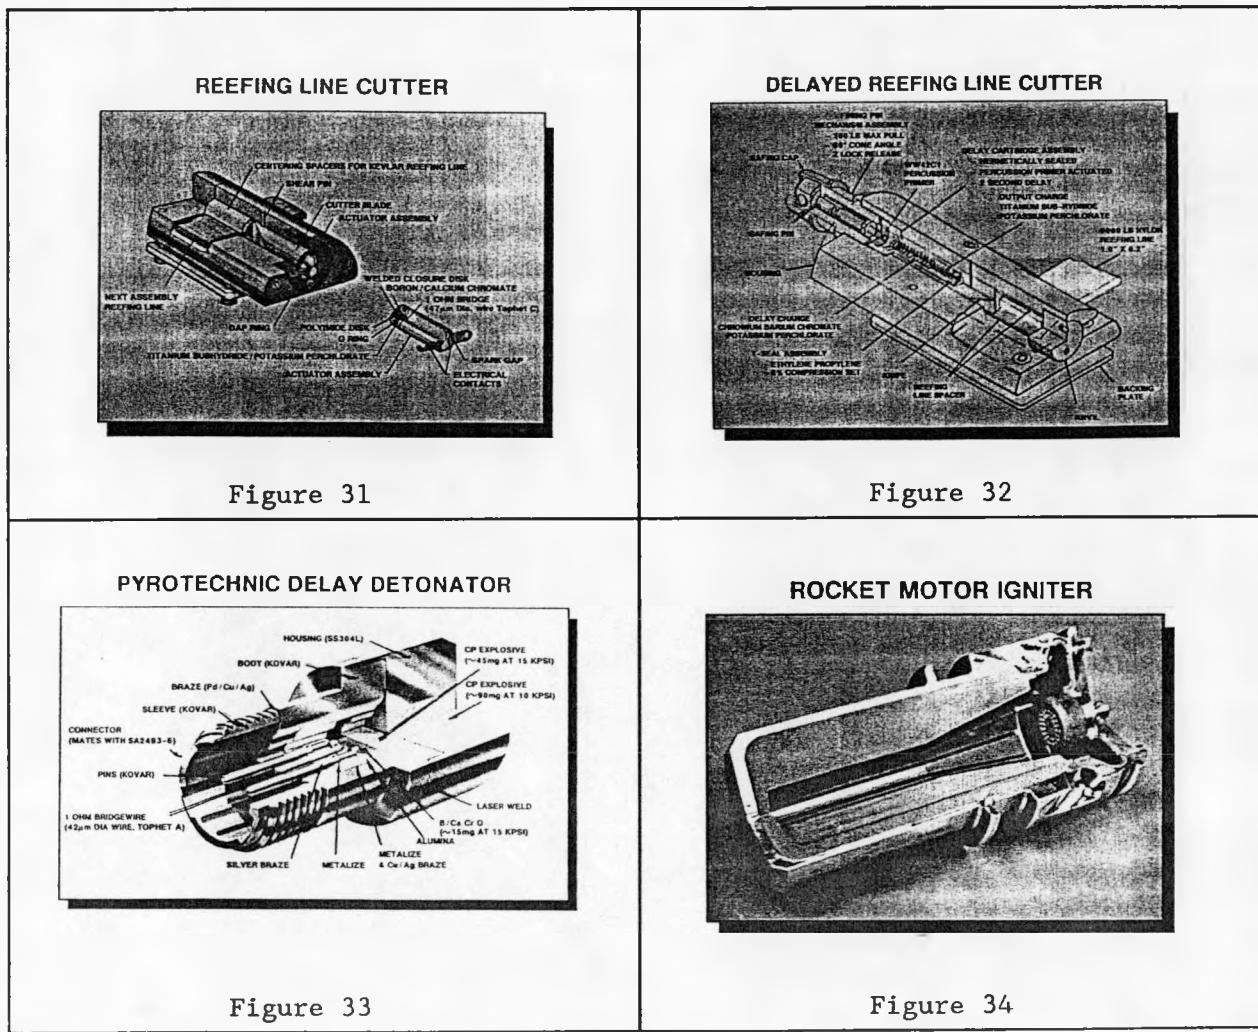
illustrates a small rocket motor with reversing thrust nozzles. The propellant is cast into the machined or cast stainless steel body. The end containing a perforated cup of baron/potassium nitrate pellets is screwed in place, and all of the closures are welded to provide a hermetic motor for exceptionally long storage life. The initiator uses two bridgewire headers for added reliability. There are eight small nozzles around the output end of the motor and the motor burn lasts only 0.1 second using an aluminum fuel ammonium perchlorate oxidizer and a hydroxy-terminated polybutadiene binder propellant. Note the kerfs cast into the propellant grain to control the thrust time profile.
